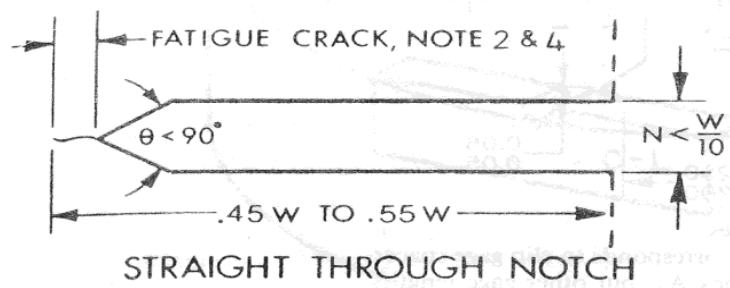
Starter Notch and Fatigue Crack for Straight Through Notch [7]
